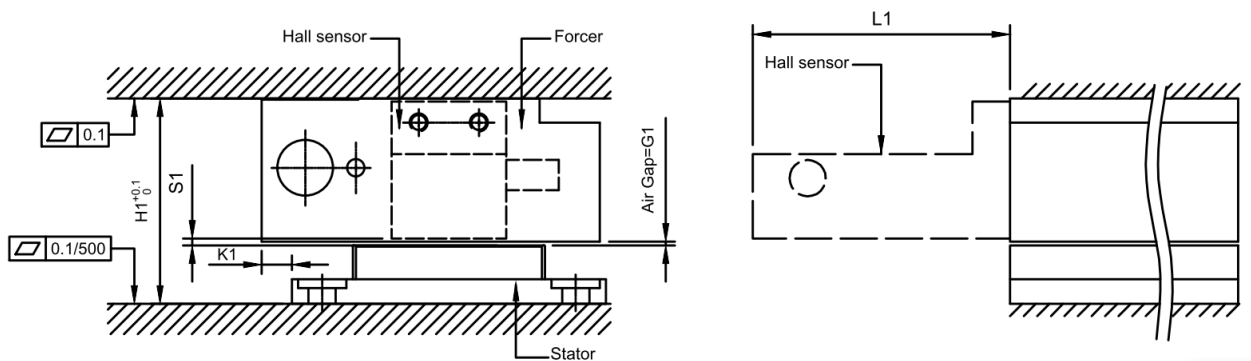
LMSA iron core linear motor assembly
